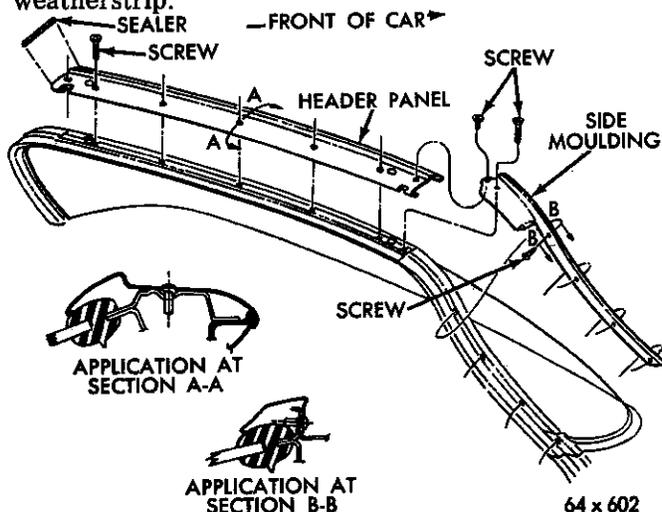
Windshield Header and Side Moulding Attachment (Convertible)
